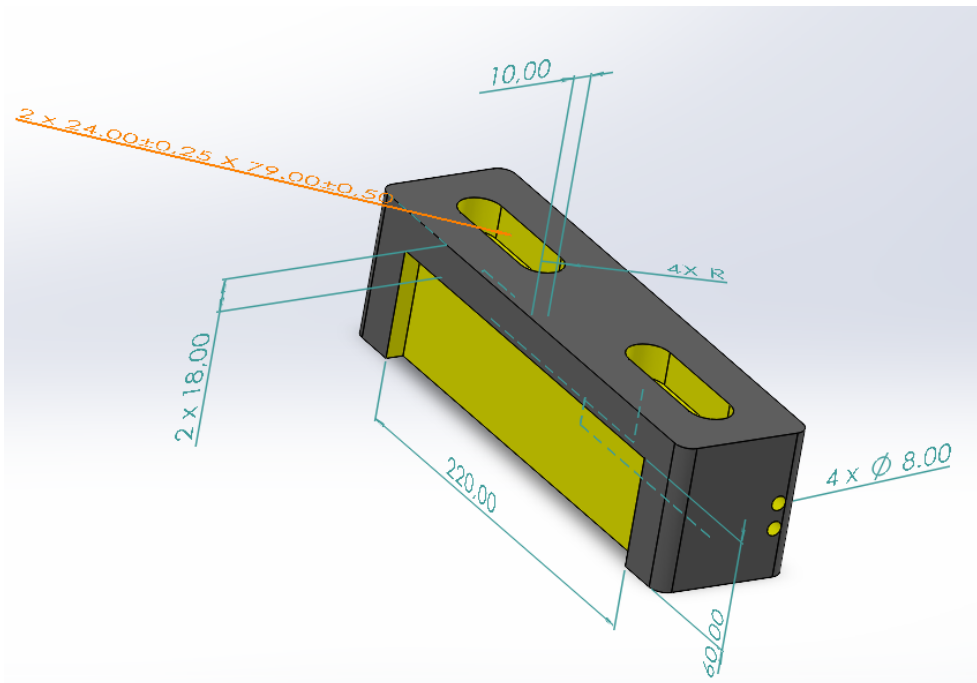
Dimensions in mm of the bottom POM casting on the movable stairs.
